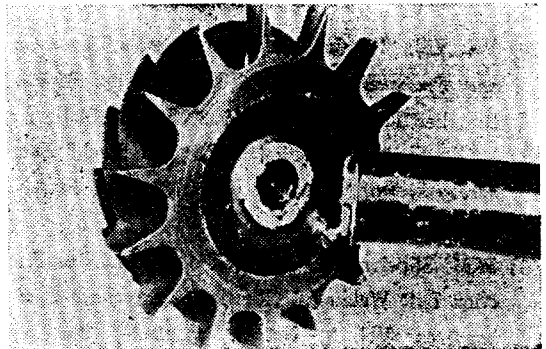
Fracture location when tensile test of turbo-charger wheel-shaft IN 713C-SAE 8630 inertia weldment.
